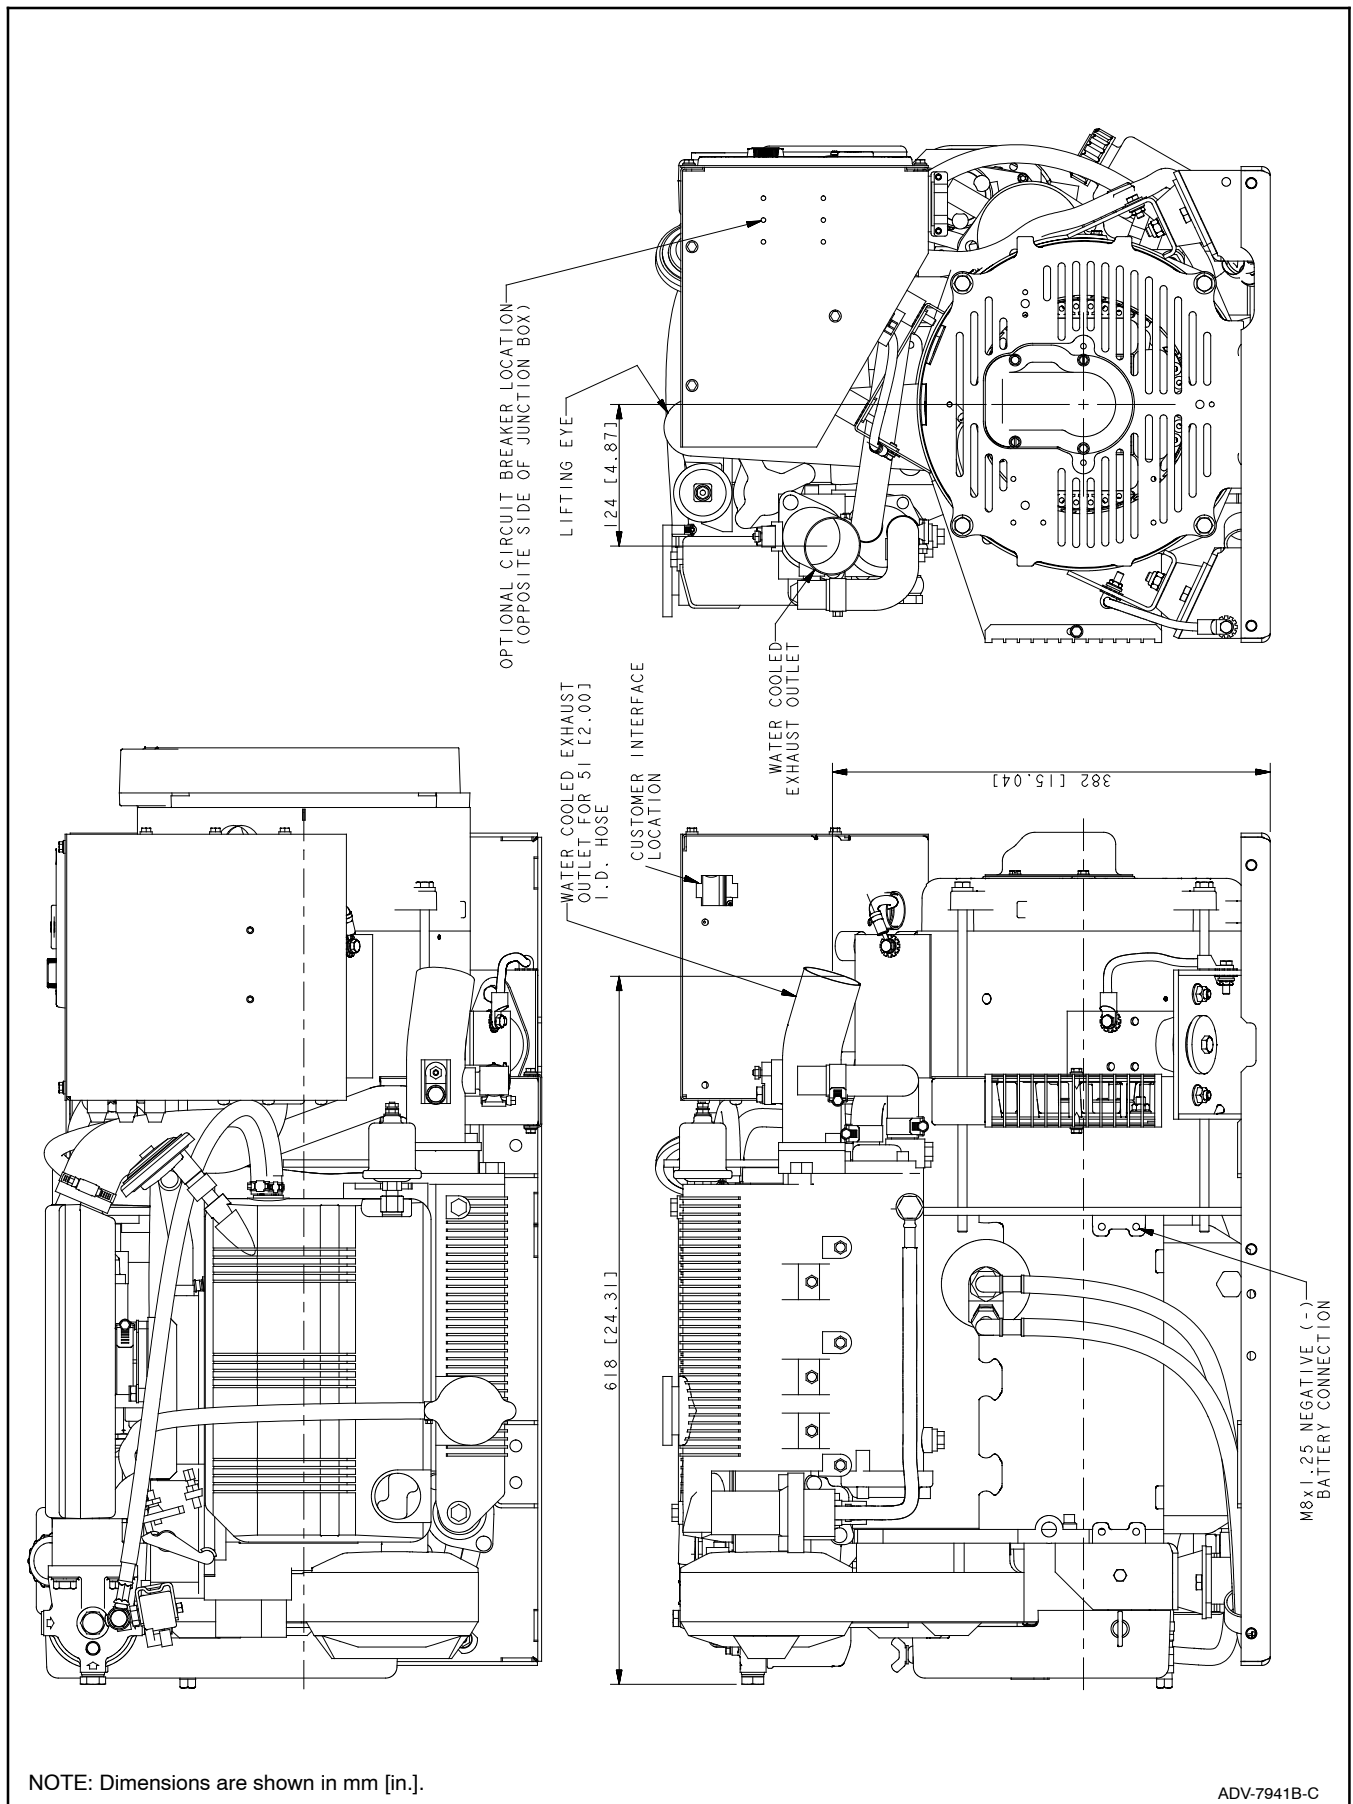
Dimension Drawing, 6EKOD and 5EFKOD (Sheet 2 of 2)
